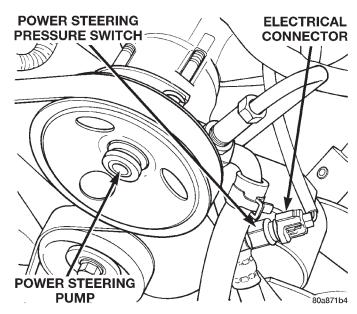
Power Steering Pump Pressure Switch—2.5L Engine
